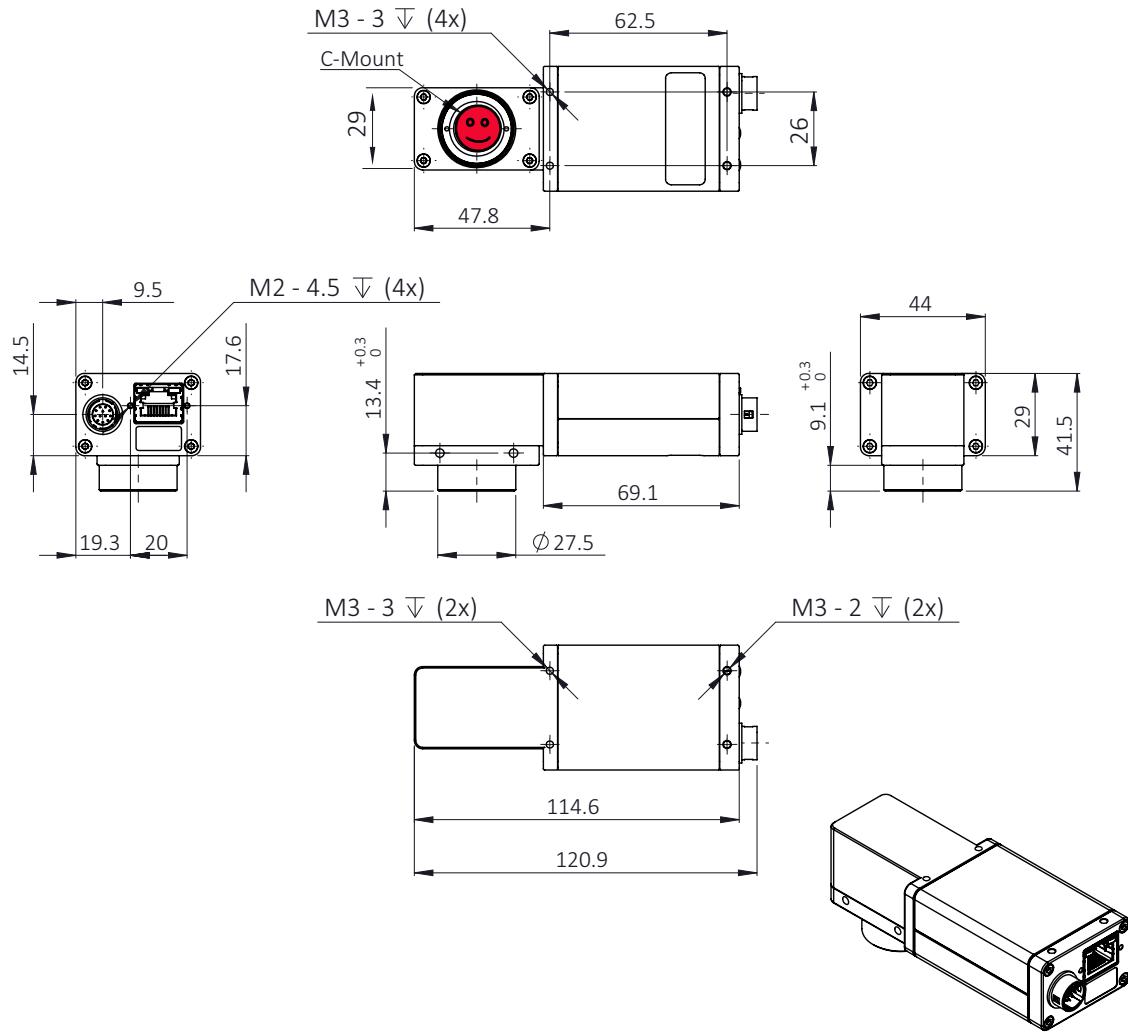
Manta type B W270 S90 housing with C-Mount dimensions
